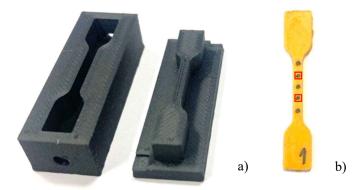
3D printed mold used for specimen preparation a), uniaxial tensile specimen with markers for deformation evaluation b); those marked in red in were employed for deformation tracking.
